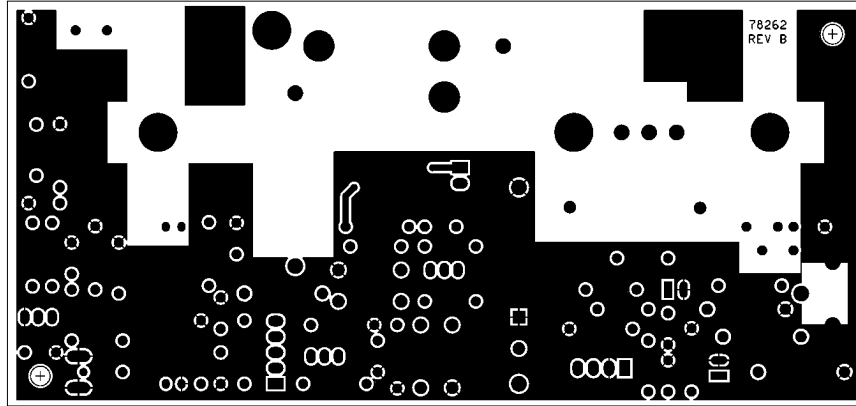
QSK BOARD (ASSEMBLY A11) TOP AND BOTTOM
